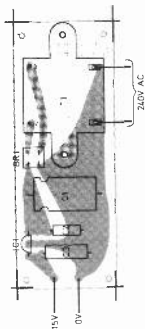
Component overlay of PSU mains earth is connected to T1 by a solder tag under the mounting bolt. The transformer's screen should also be connected to earth
